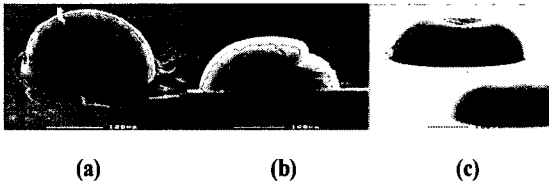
various defects of molded micro lens: (a) slip, (b) burst, and (c) shrinkage
